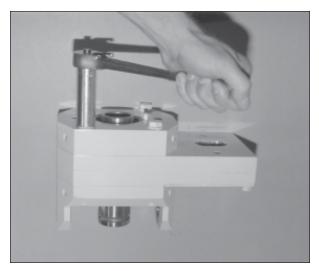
Attach bottom plate, gear drive box, and top plate.
